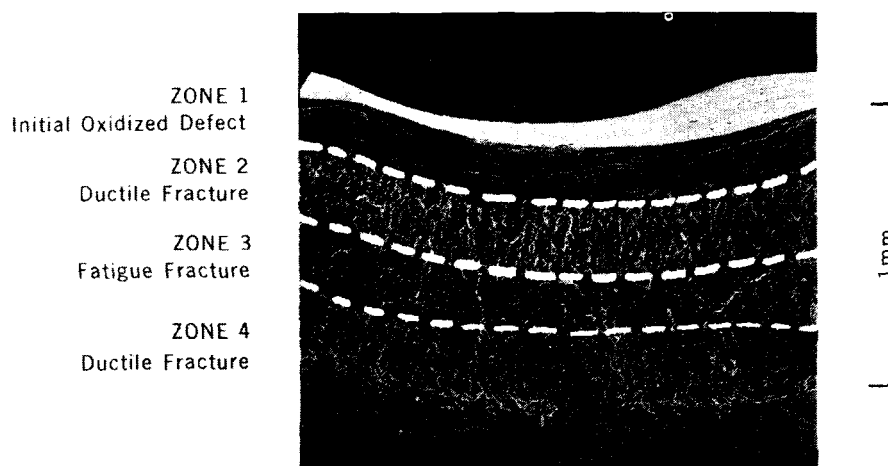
CROSS SECTION OF THE FRACTURE SURFACE FROM FAILED TITANIUM CONDENSER TUBE
